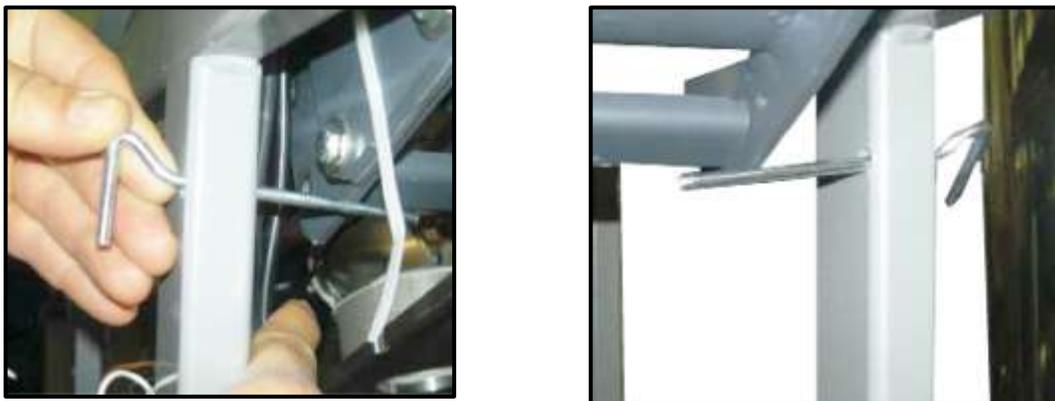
Lift Pins Inserted into Lift Holes, Left and Right Sides (Step 17)
